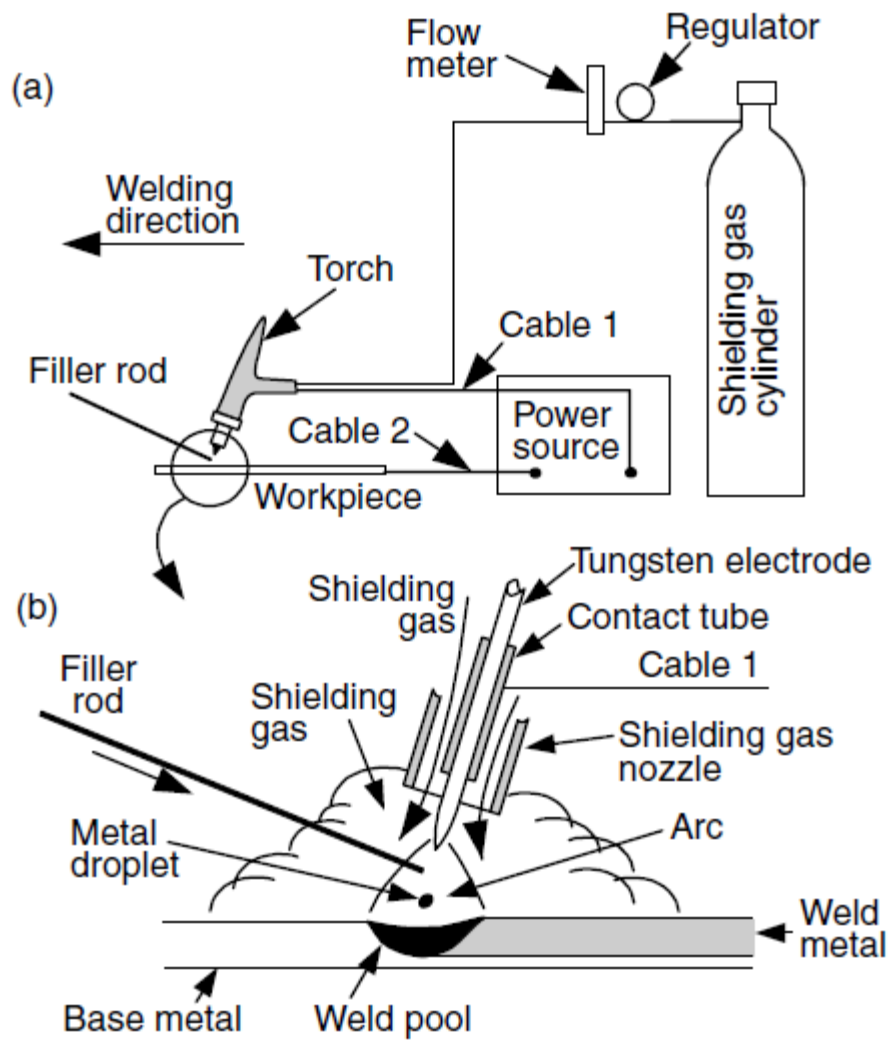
Gas-tungsten arc (a) overall process (b) welding area enlarged [54]
